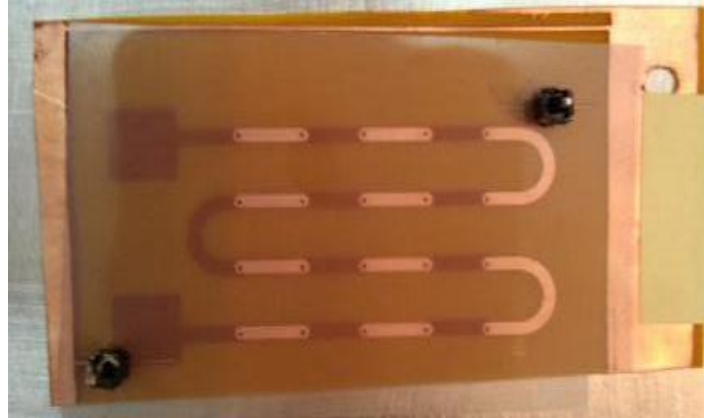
15 The PET stencil and FPCB fixed on the mounting plate
